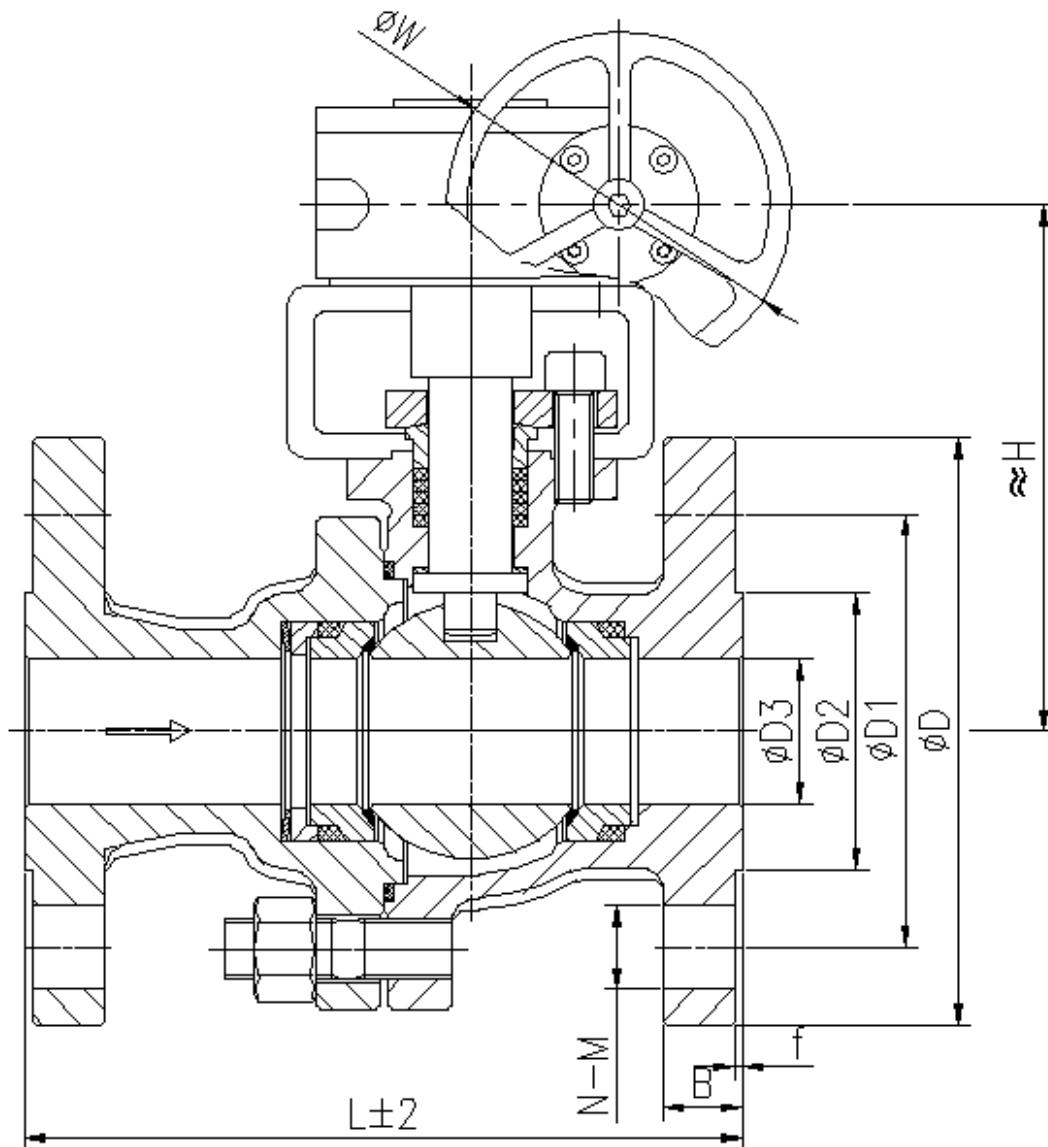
Dimensions of Linor floating ball valve with high temperature seat lever, PN40, flanged, sizes DN15-65
